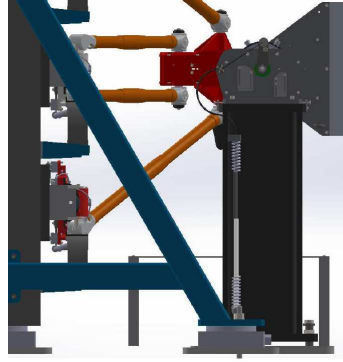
Close side view to the CAD drawing of ARROW PKM showing the springs used in the turntable. [22].
